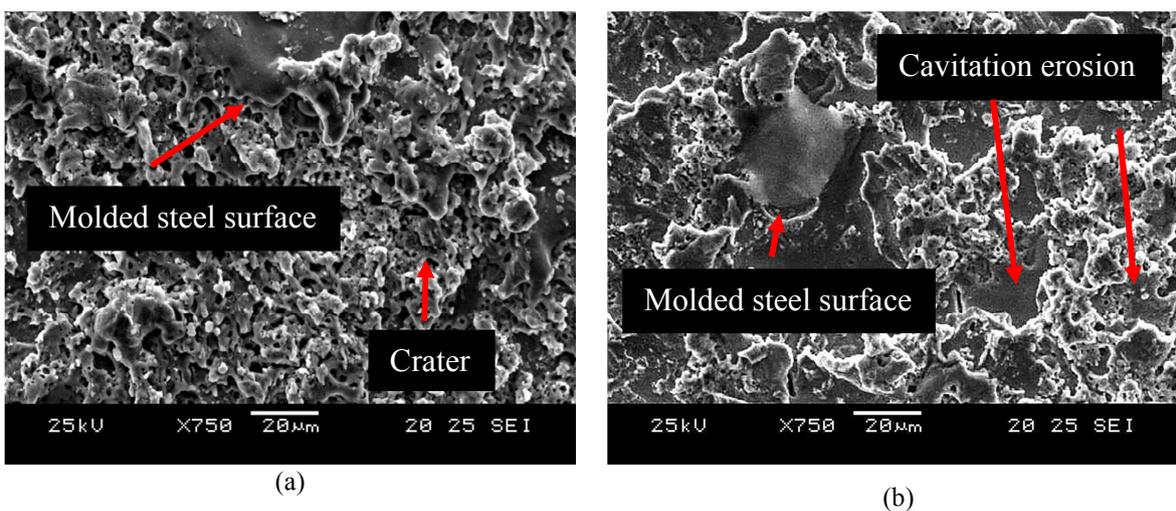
(a) EDM cut surface of SAE 304 stainless steel (b) surface after USM at P=400 kPa
